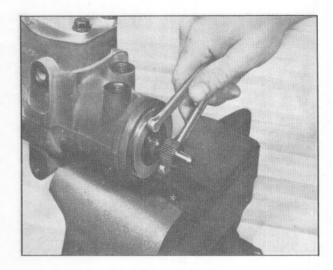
Loosening Adjuster Plug Lock Nut
